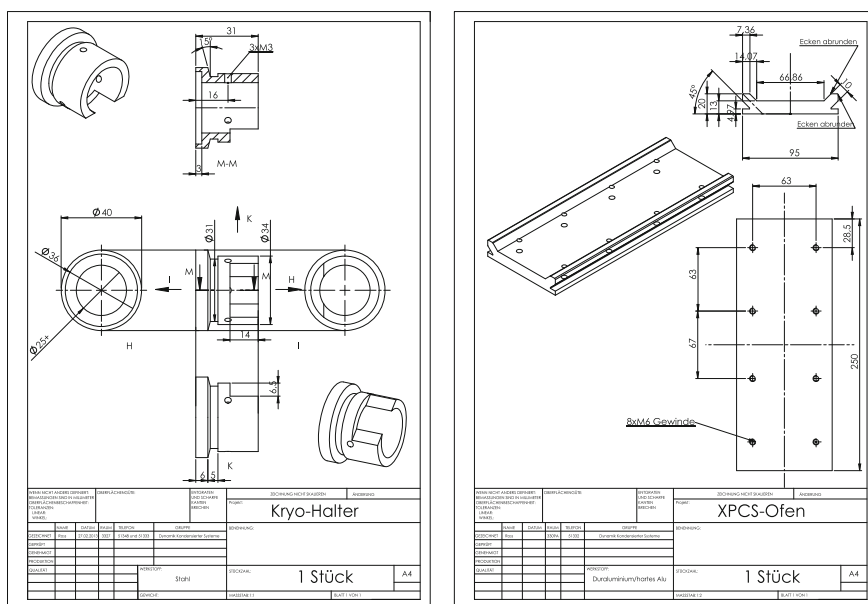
Technical drawings of cold finger clamping flange and ESRF adaptor plate
